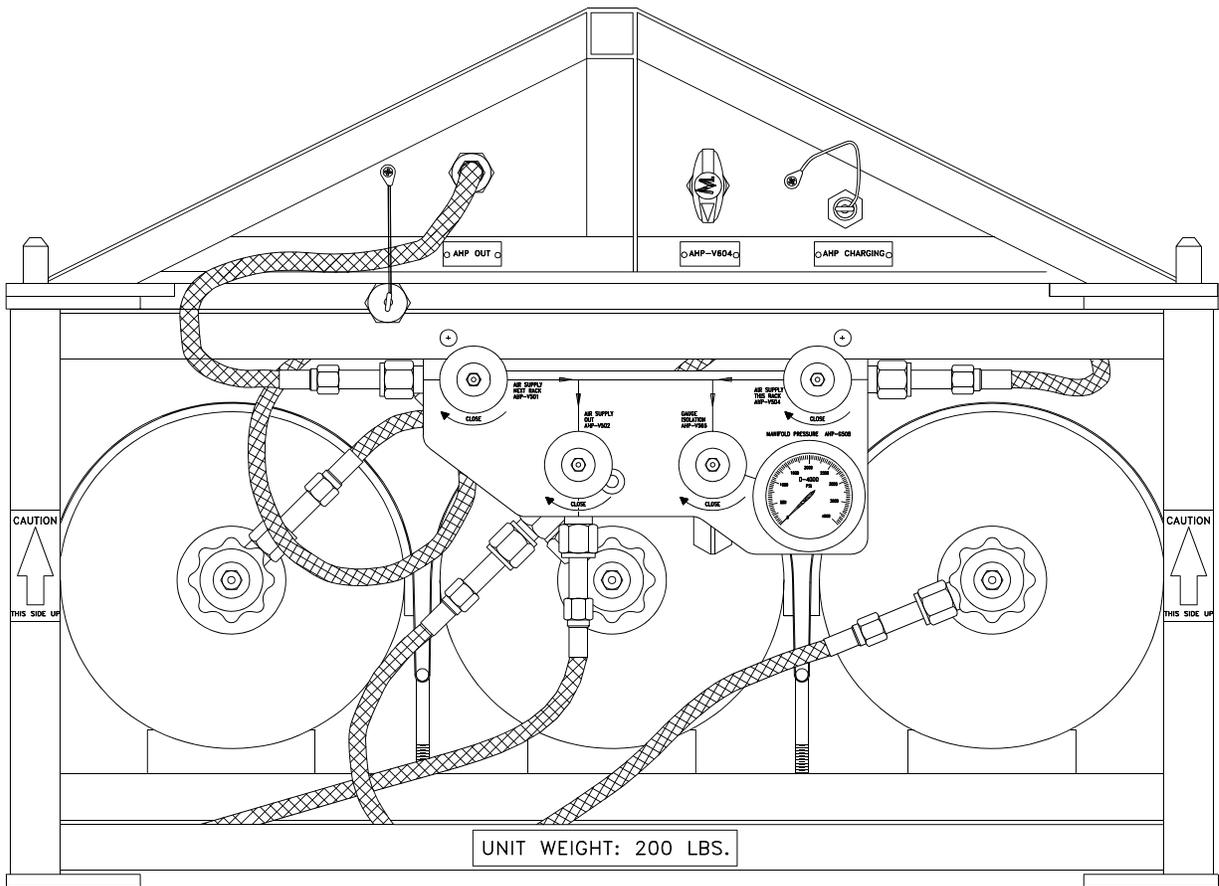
Secondary HP Air Supply with Roof Rack Assembly, Configuration 1
